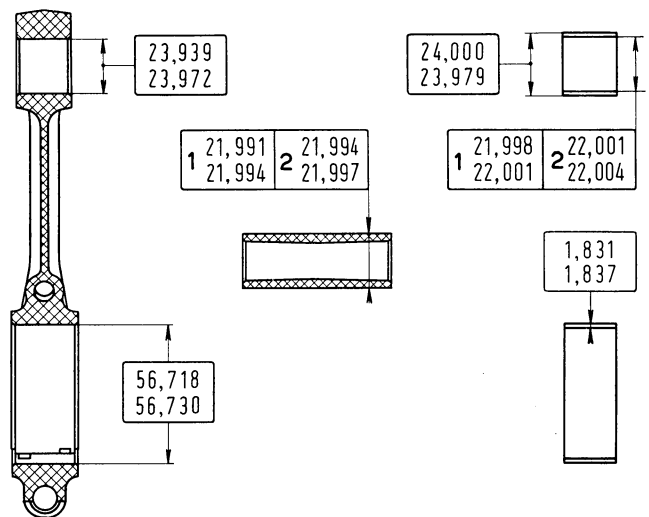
Critical dimensions of 115 C.005 engine connecting rods, small end bushings, rod bearings and piston pins (in mm). (Bushing bore specifications in figure apply to a small end bushing reamed in place).
